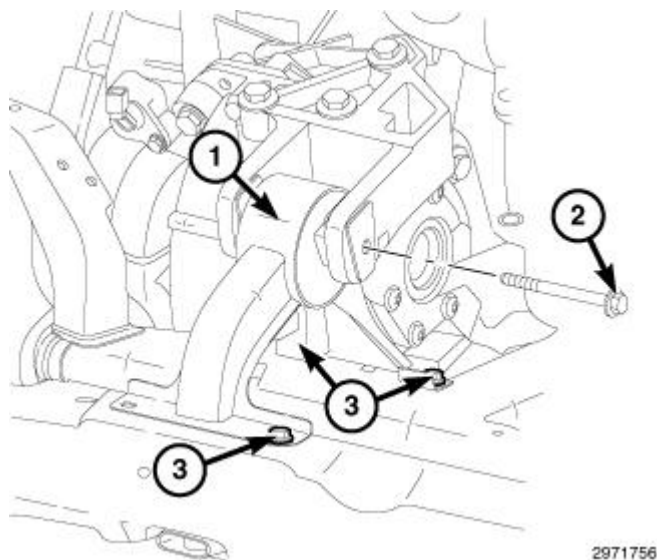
Rear Engine Mount, Rear Mount Through Bolt & Bolts
